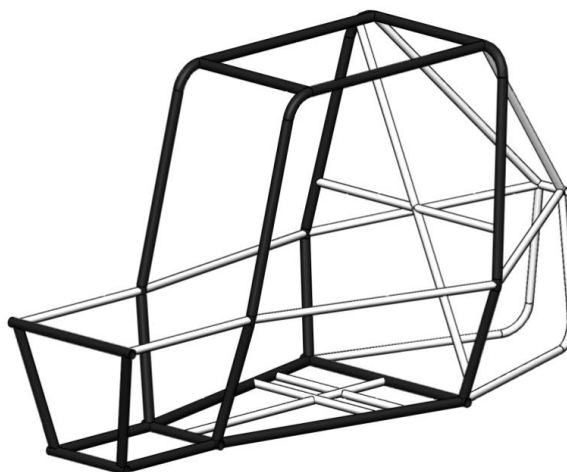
Roll Cage, Primary Members (filled in black), Rear Braced Frame
